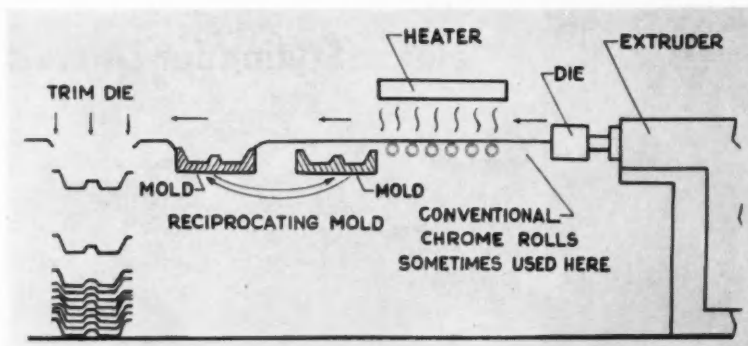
CONTINUOUS IN-LINE THERMOFORMING. Material is extruded in sheet form, passes under radiant pre-heater immediately before forming.
